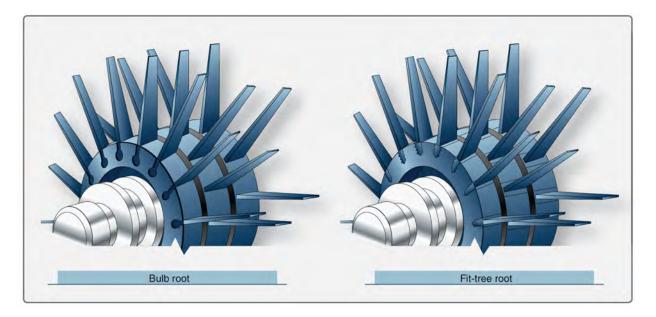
Common designs of compressor blade attachment to the rotor disk.
